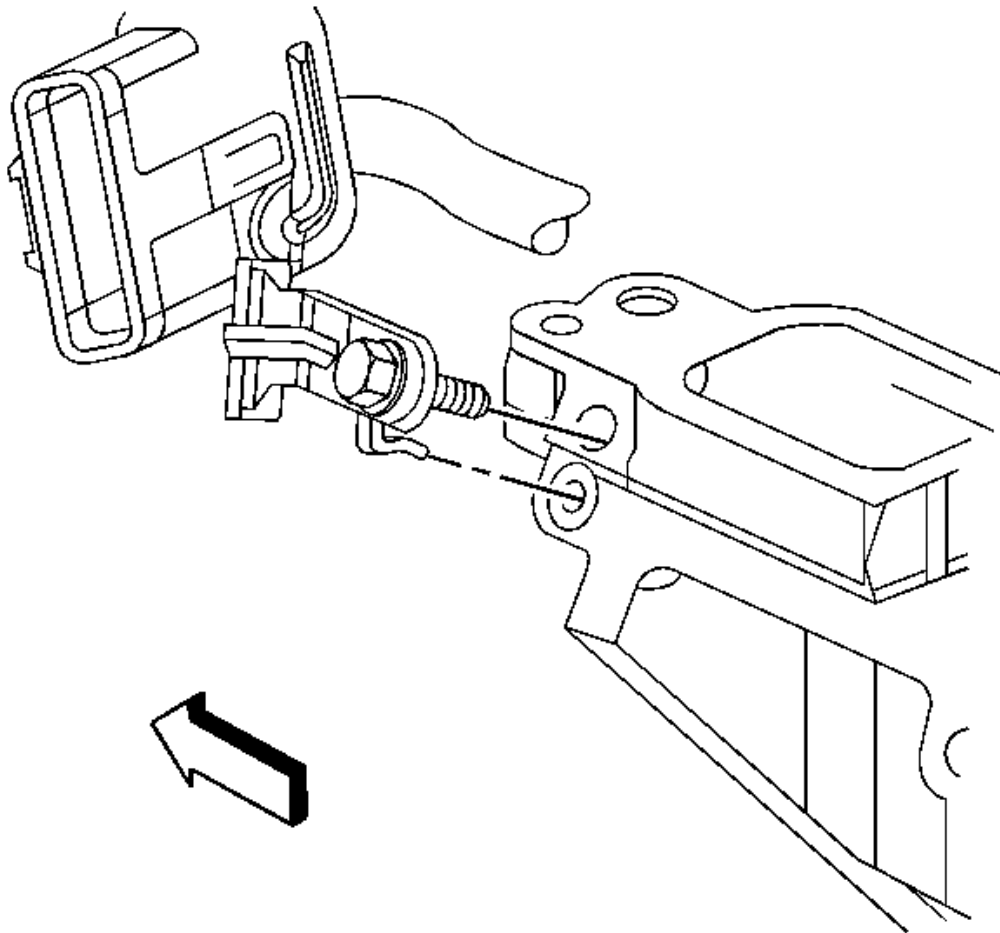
Identifying Fuel Injector Wiring Harness Connector Bracket Bolt
